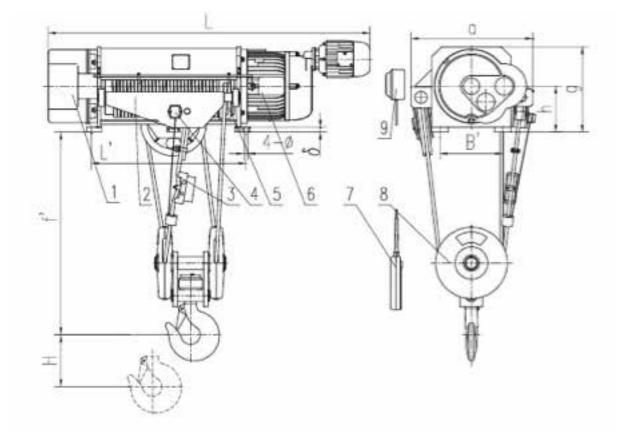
Outline Structure Drawing for PWMDF16T24M and PWMDF20T24M Fixed Hoist
